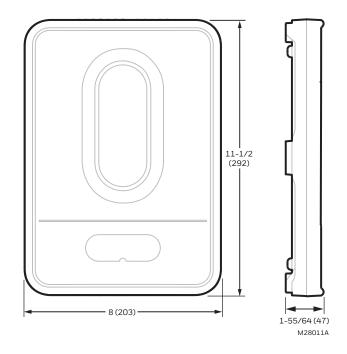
HZ322 TrueZONE panel dimensions in in. (mm).
